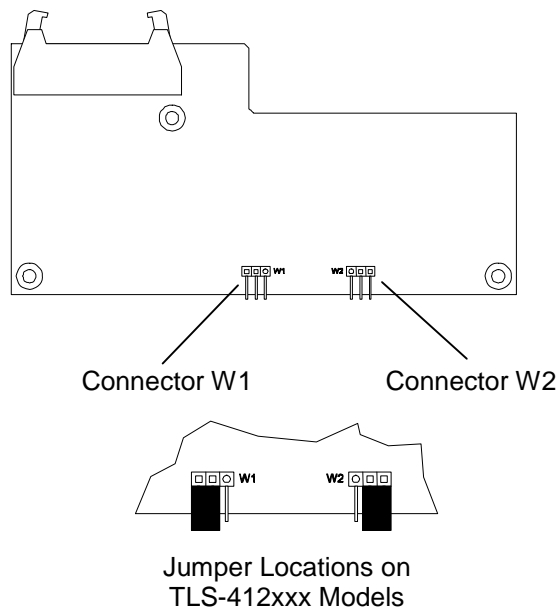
Location of Connectors W1 and W2 on Y-Clear Detector PCBA
